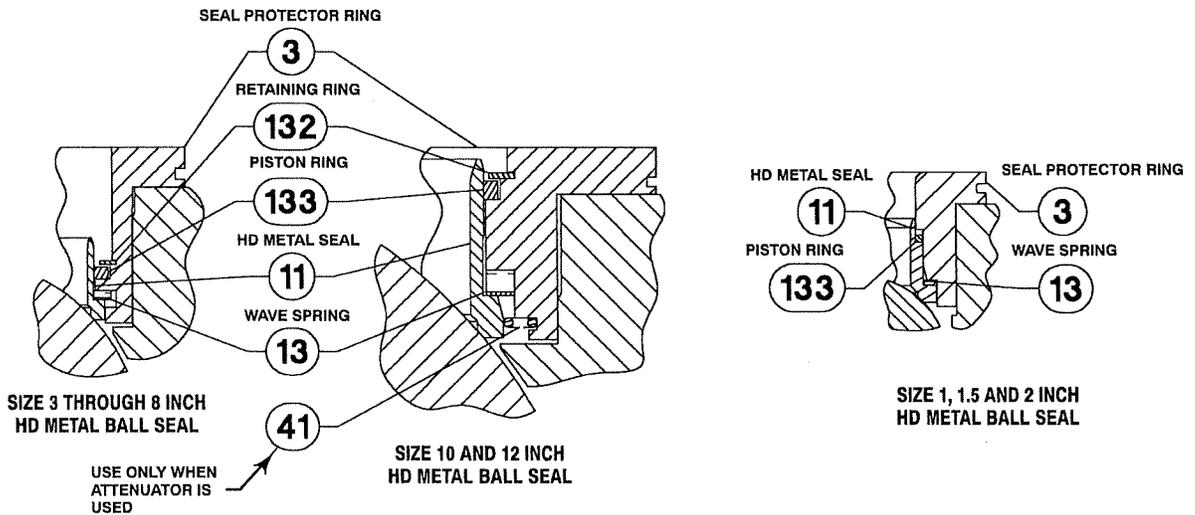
Ball Seal Assembly for Size 1, 1.5, and 2-Inch Valves
